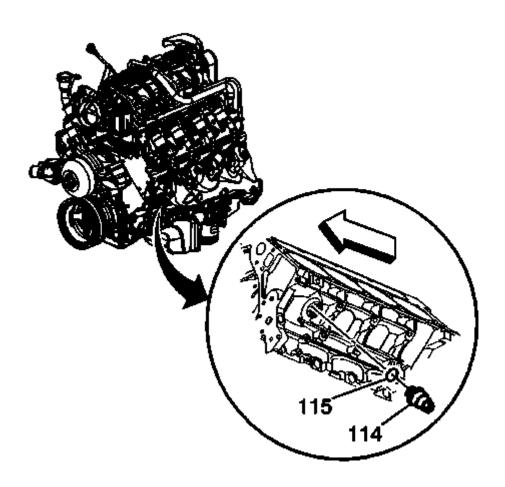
View Of Engine Block Coolant Heater & Washer Courtesy of GENERAL MOTORS COMPANY
